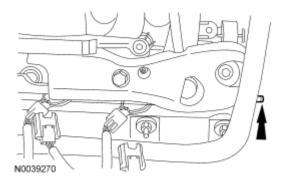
Stud Bolt Courtesy of FORD MOTOR CO.
